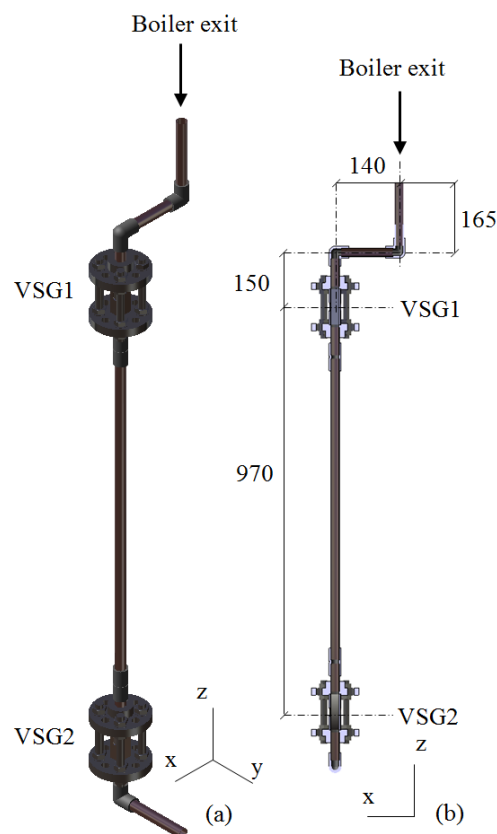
(a) A 3D CAD model of the vertical setup; and (b) cross-section view with dimensions.
